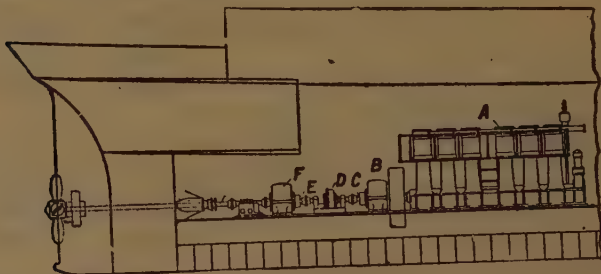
,758.—The Menlees system of propelling ships by gas engines. In the figure A is a six cylinder gas engine coupled to a dynamo B. The shaft C of the dynamo and engine is adapted to be connected by a clutch D with the shaft E of the electric motor F, which is connected with the propeller shaft. *In operation*, at all ahead ship speeds direct driving may be employed, but, for speeds less than half, the electrical transmission may be used, the motor F, receiving electrical energy from the dynamo B. The drive may also be employed for reversing the astern speed by not greater than half the full ahead speed, suitable switches and gear being provided.
